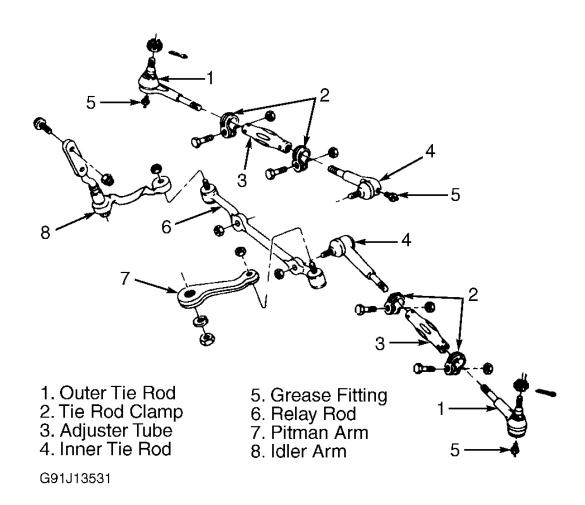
Exploded View Of Steering Linkage (2WD) Courtesy of GENERAL MOTORS CORP.
